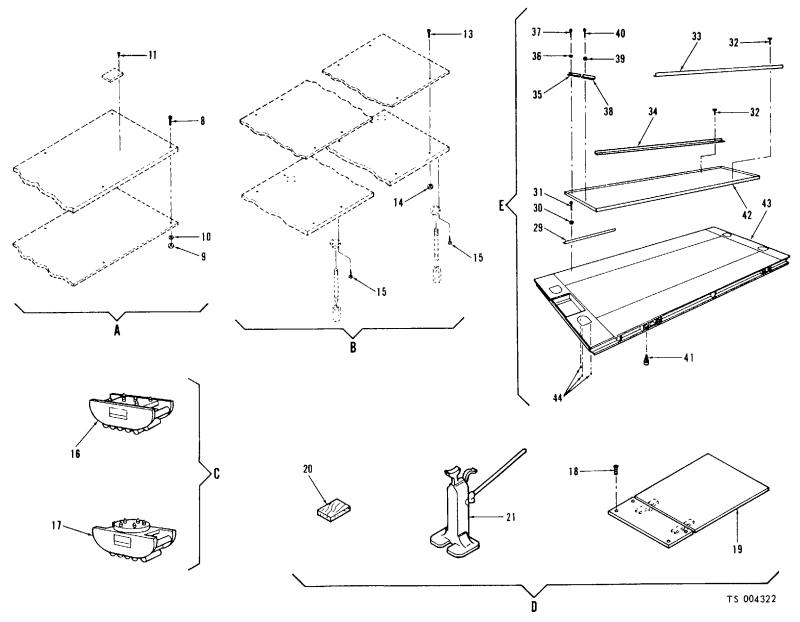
Press Package Assembly Type III (Sheet 2 of 2).
